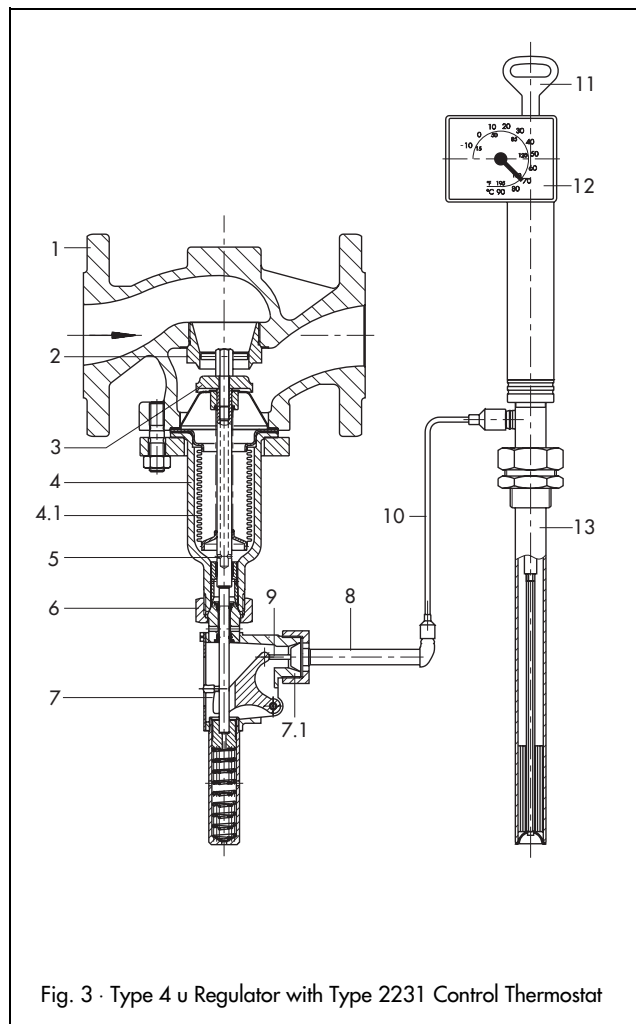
· Type 4 u Regulator with Type 2231 Control Thermostat
